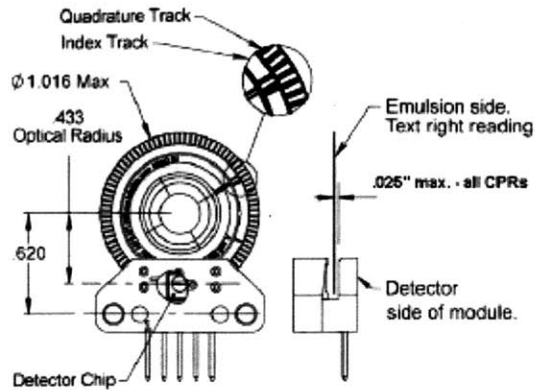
The encoder has very rigid geometric attachment constrains. The disk must be placed a maximum 0.025" away from the inner edge of the encoder module [29].
